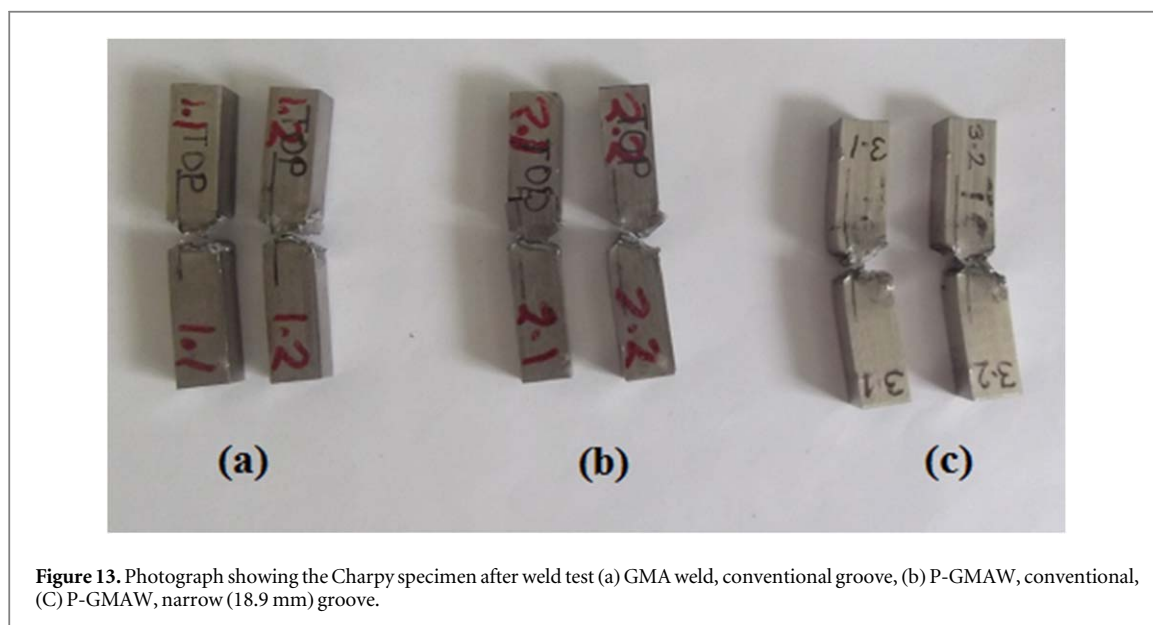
Photograph showing the Charpy specimen after weld test (a) GMA weld, conventional groove, (b) P-GMAW, conventional, (c) P-GMAW, narrow (18.9 mm) groove.
